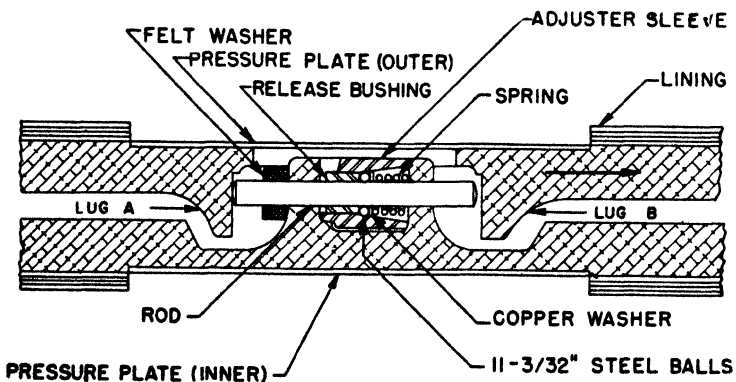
DISC-BRAKE SELF-ADJUSTING MECHANISM.
